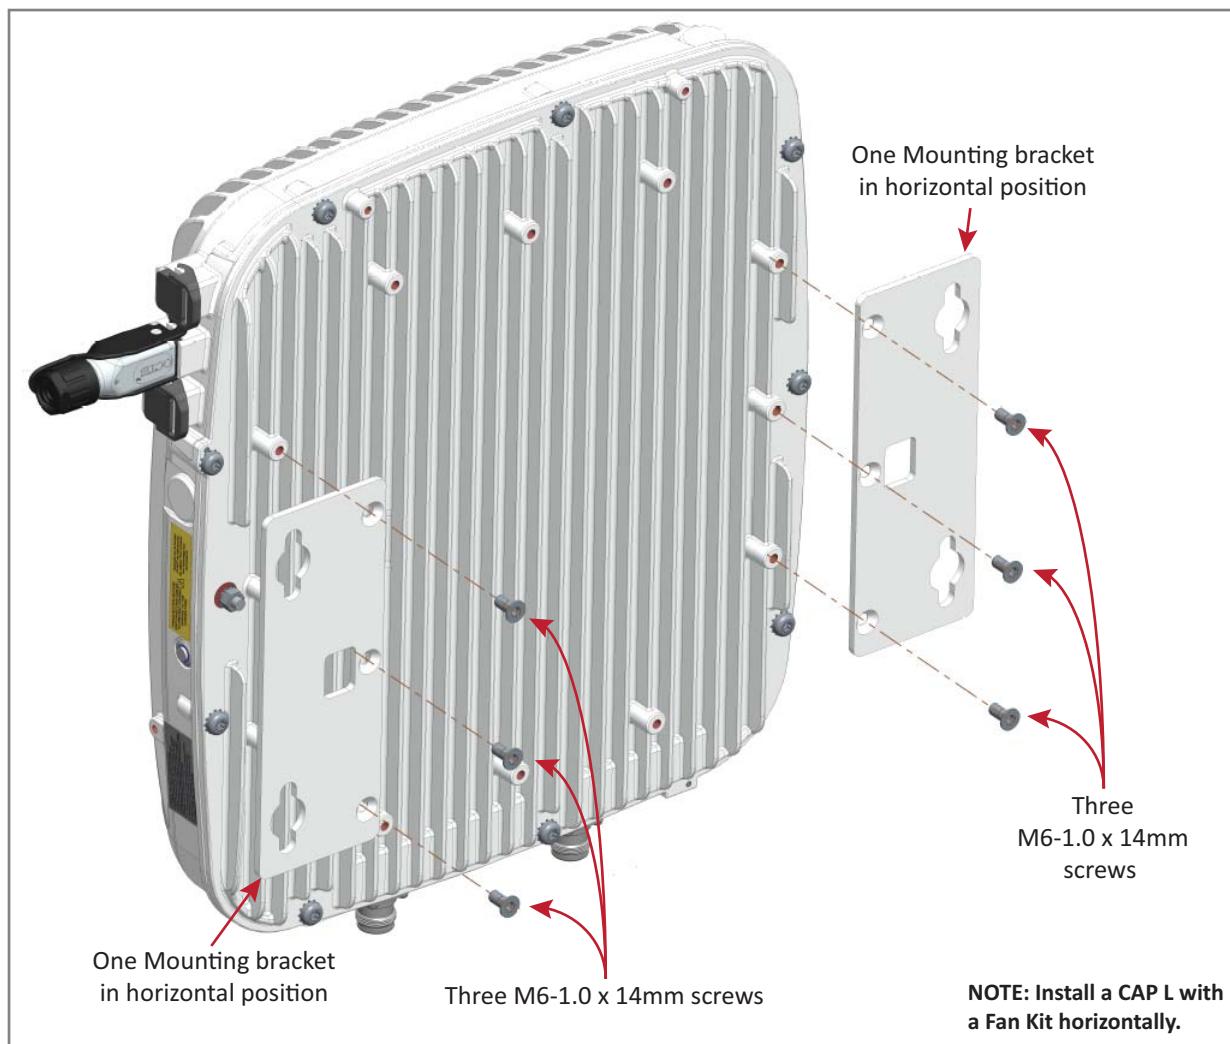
CAP L (No Fan Kit) with Flat Mounting Bracket Kit (PN 7774353-xx)
